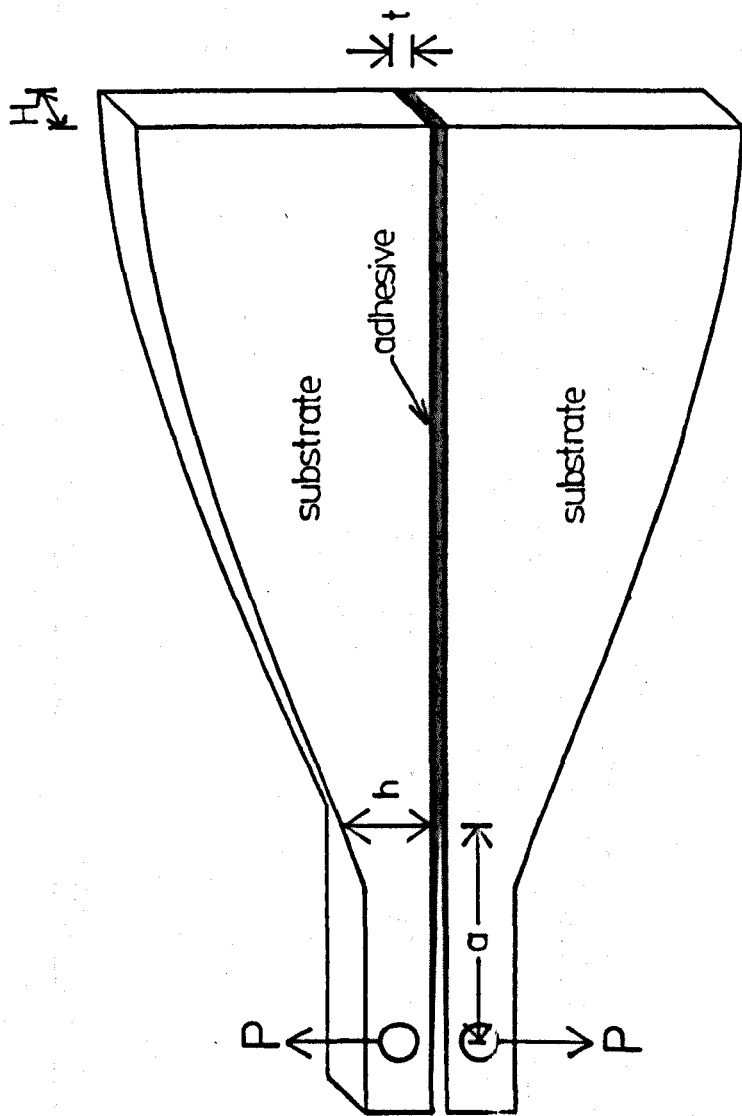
Contoured – double – cantilever – beam adhesive joint specimen.
